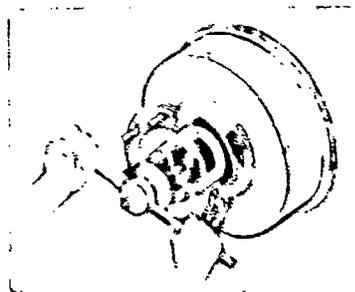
Pressing out the external ring of the front wheel bearing of a ZIL-130
